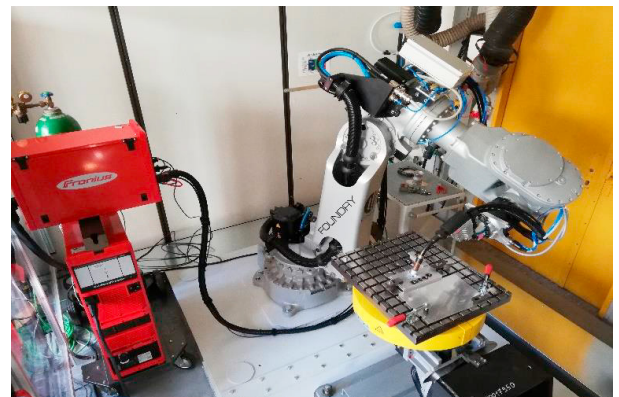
WAAM system cell consisting out of the 6-axes robot, the tilt-turntable, the Fronius welding source and the welding torch
